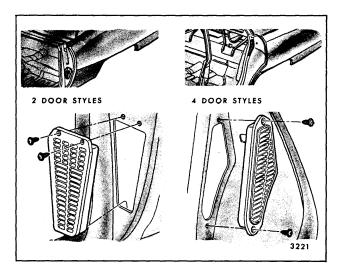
Pressure Relief Valve - "B & C" Styles Shown
